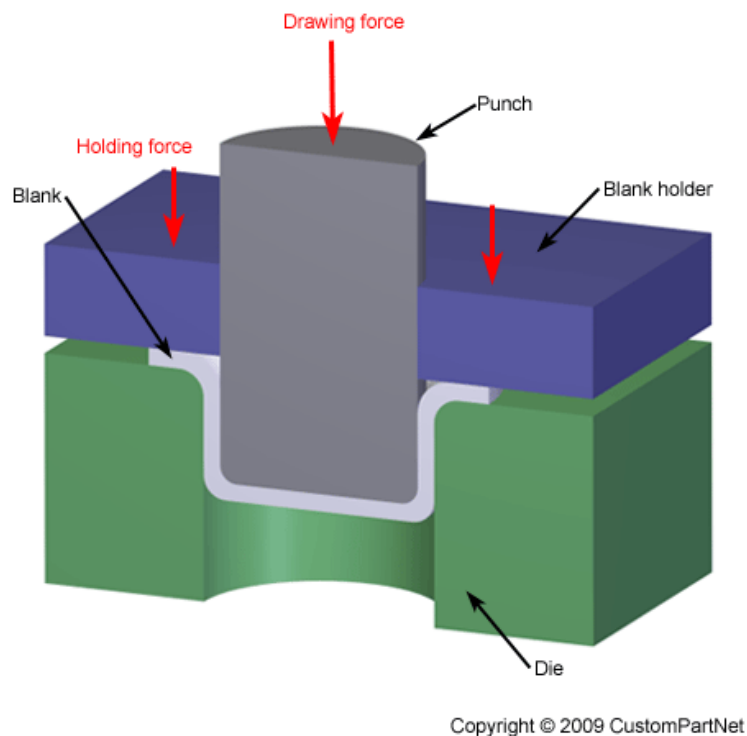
Deep Drawing of Sheet metal (Sheet Metal Forming, 2018).
